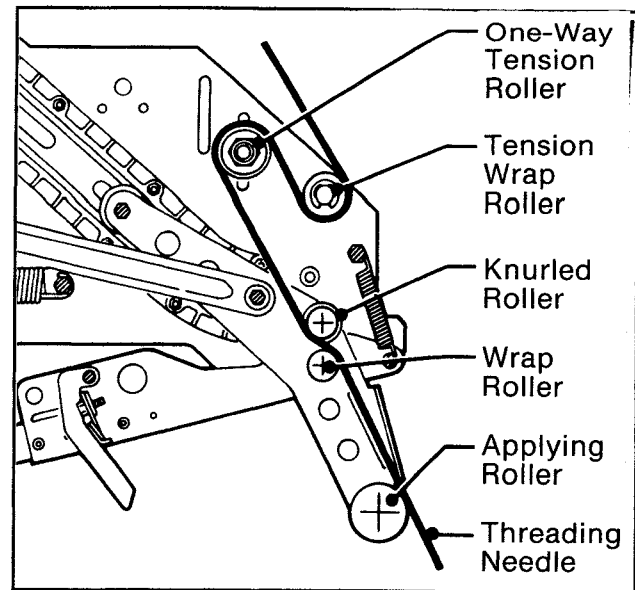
Tape Threading Diagram, Lower Taping Head (Left Side View)
